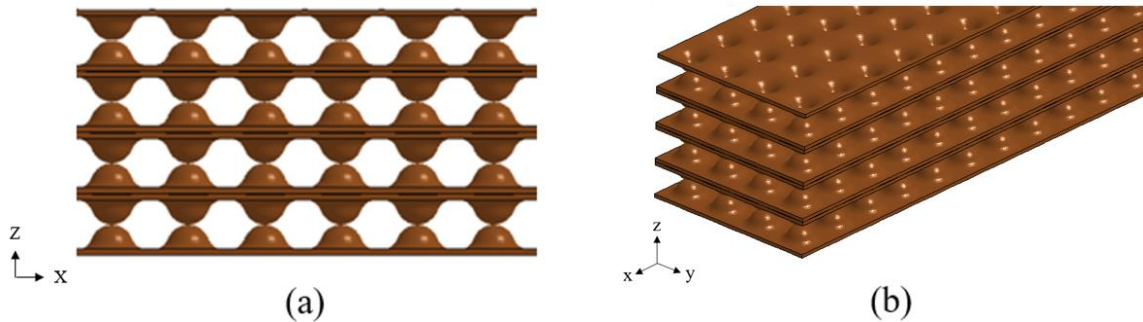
The hemispherical design in (a) front view, (b) isometric view.
